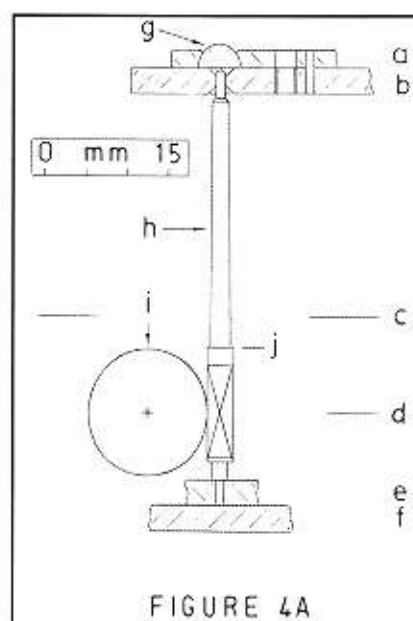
Endless bottom bearing lateral adjuster. Fig 4A (right) - Endless bearings and meshing with bay leaf gear
